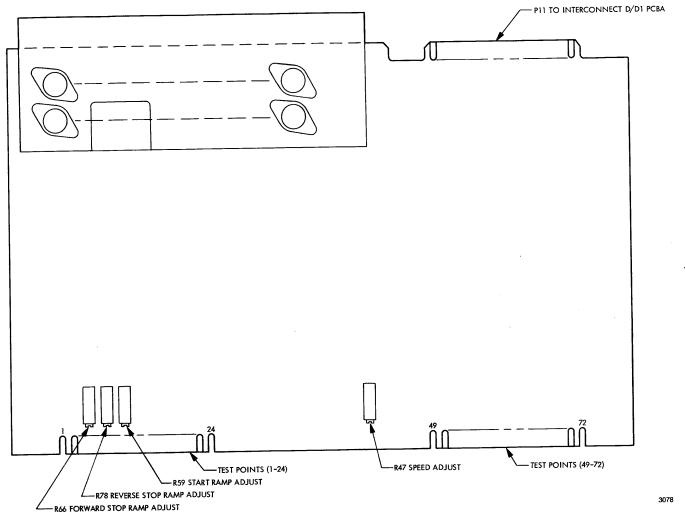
Capstan/Regulator PCBA Test Point/Connector/Adjustment Locations
